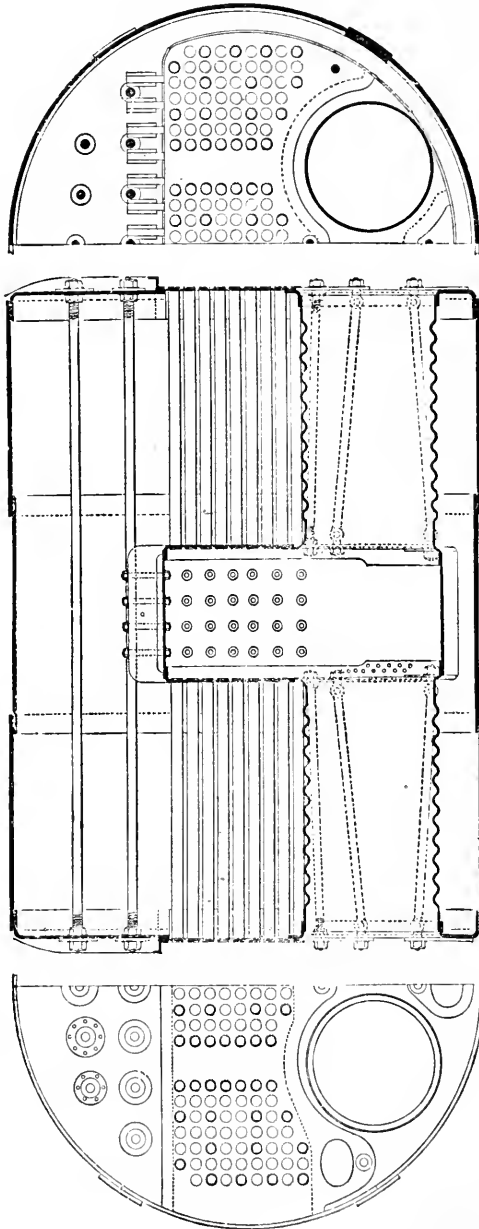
Double-ended Boiler with One Combustion Chamber.
